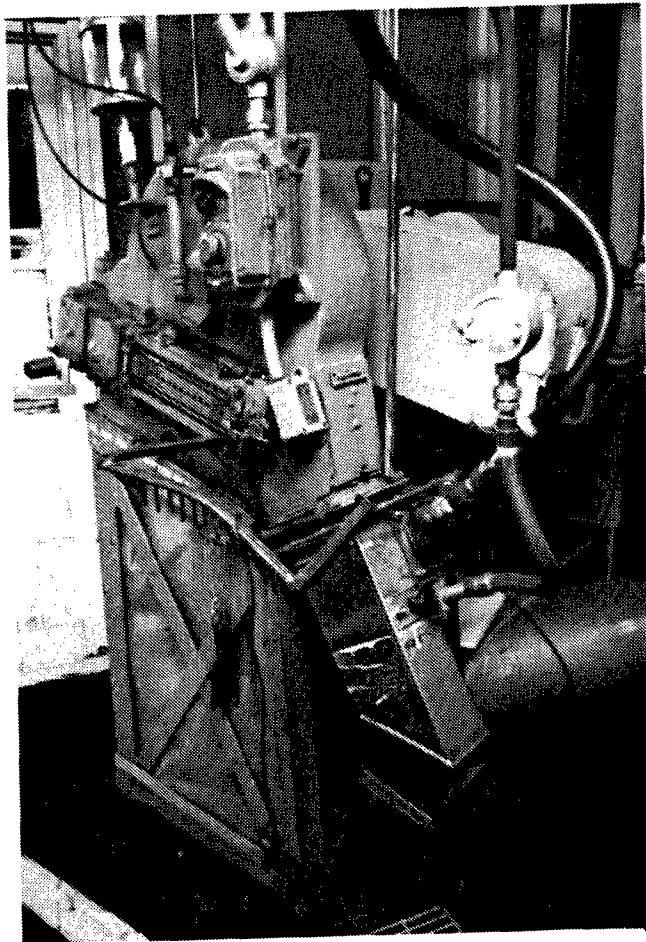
Building 5008-1: This McKiernan-Terry Company cutting machine was initially employed at the Sunflower Army Ammunition Plant.
